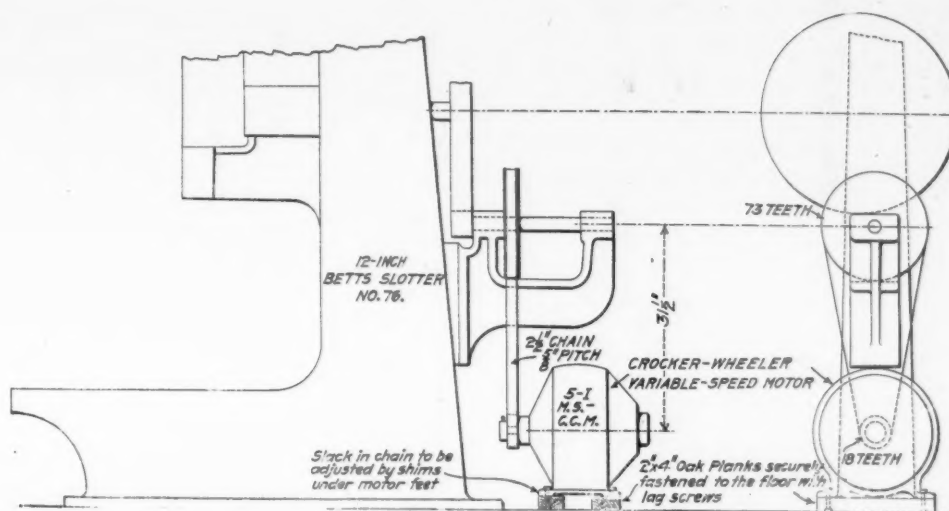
DETAILS OF THE MOTOR-DRIVE APPLICATION TO THE 12-IN. BETTS SLOTTOR.
